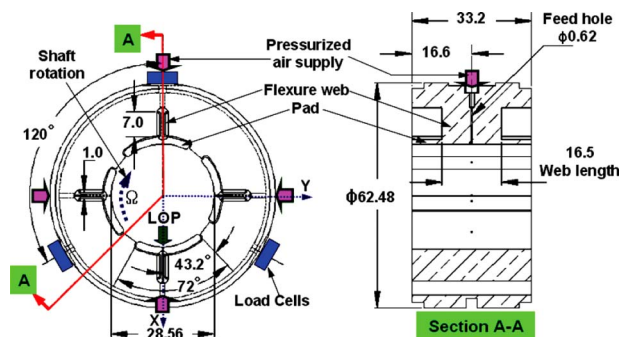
Dimensions of flexure pivot pad hydrostatic gas bearing (units: mm)
